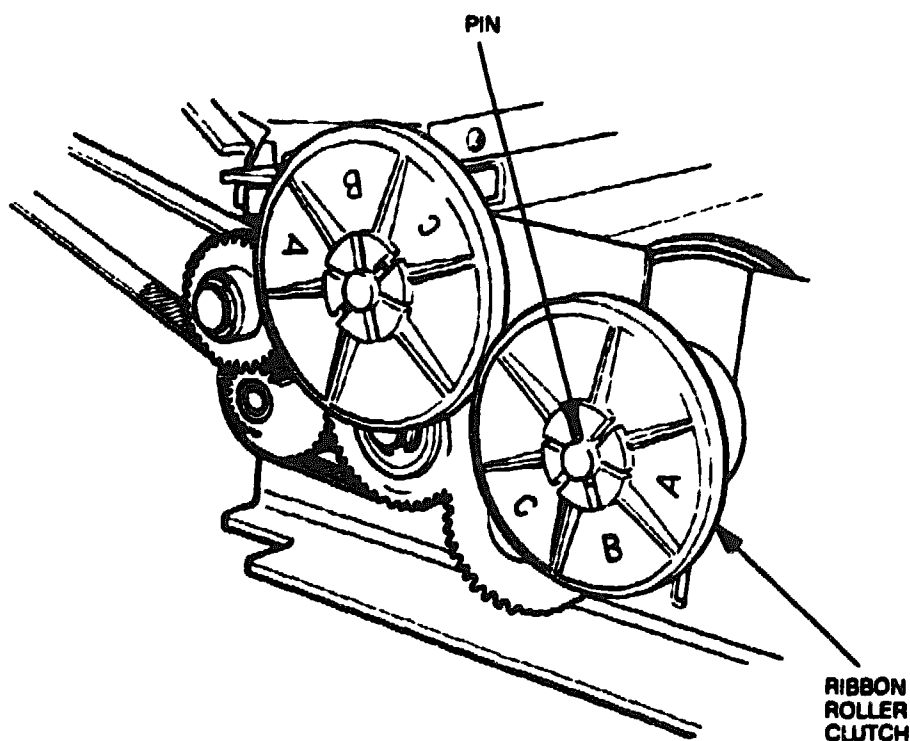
Ribbon Take-Up Roller Clutch Adjustment
